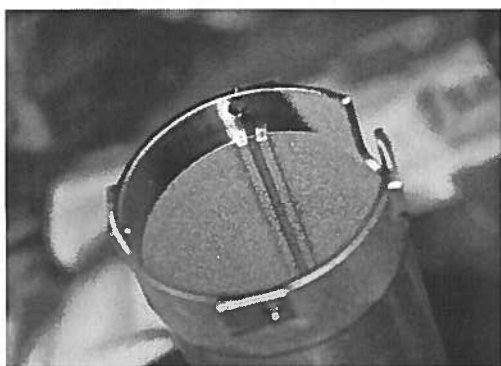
LC Ti-6Al-4V boom with a slot to hold electronic card, after final machining.
